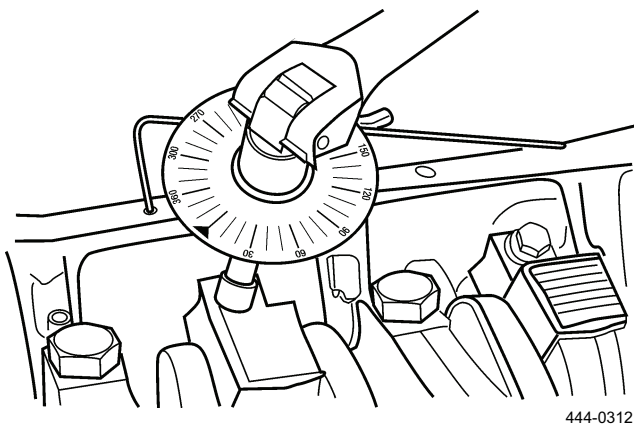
Lubricating Cylinder Bore and Bearing Cap Installation.
